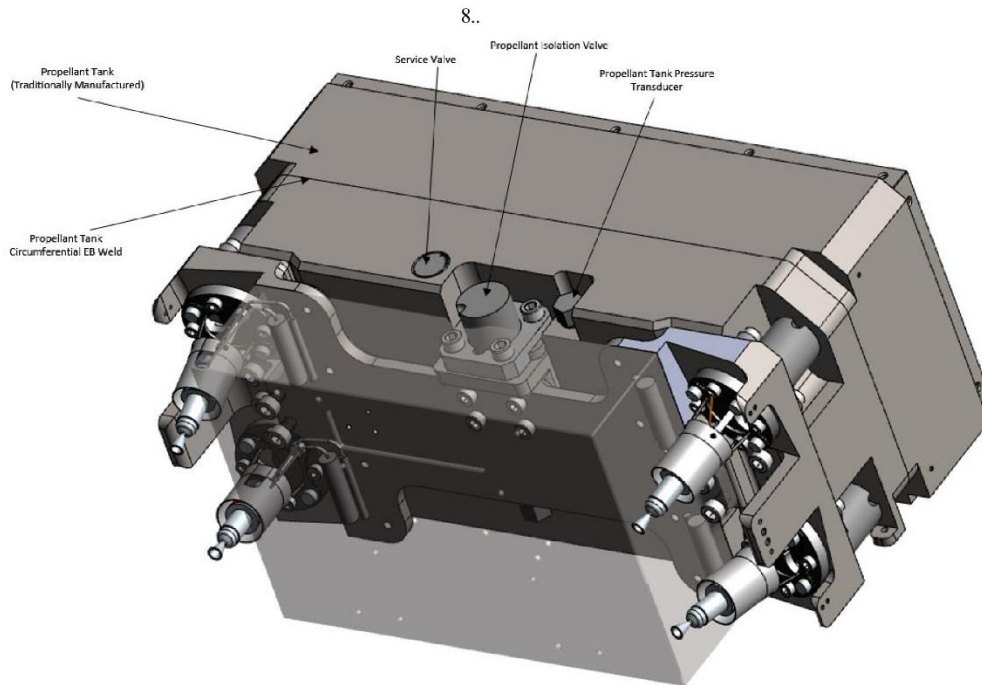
Propulsion System Fracture Critical Components and Welds
